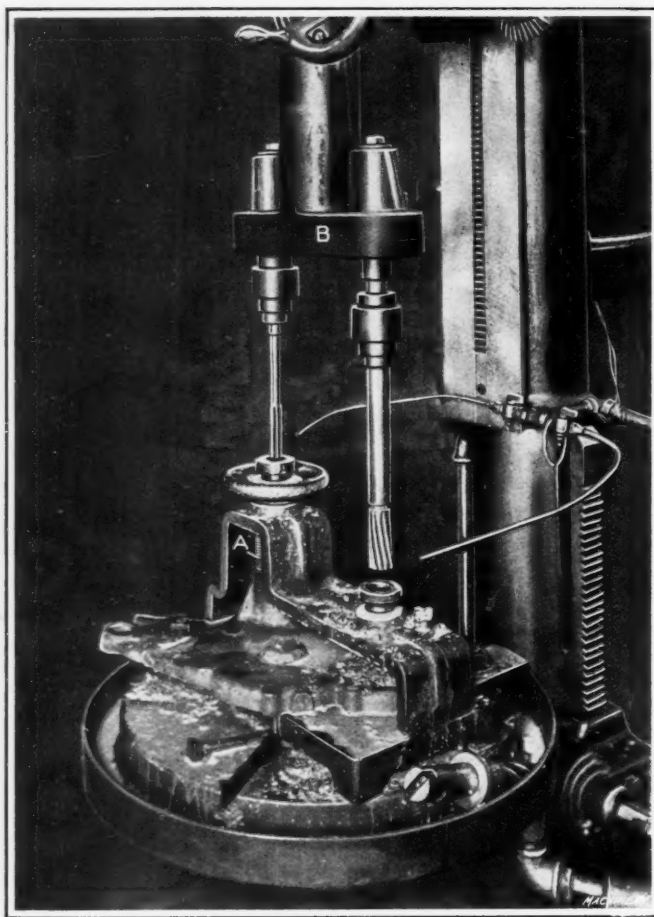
Cincinnati 24-inch Upright Drill equipped with Sellow Two-spindle Drill Head, Wiard Quick-change Chucks and Tools for boring and reaming Starter-crank Shaft and Magneto Shaft Bearings in Timing Gear-case Covers
